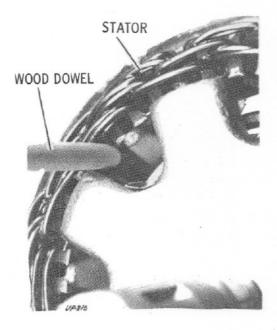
DISLODGING STATOR USING DOWEL TOOL
